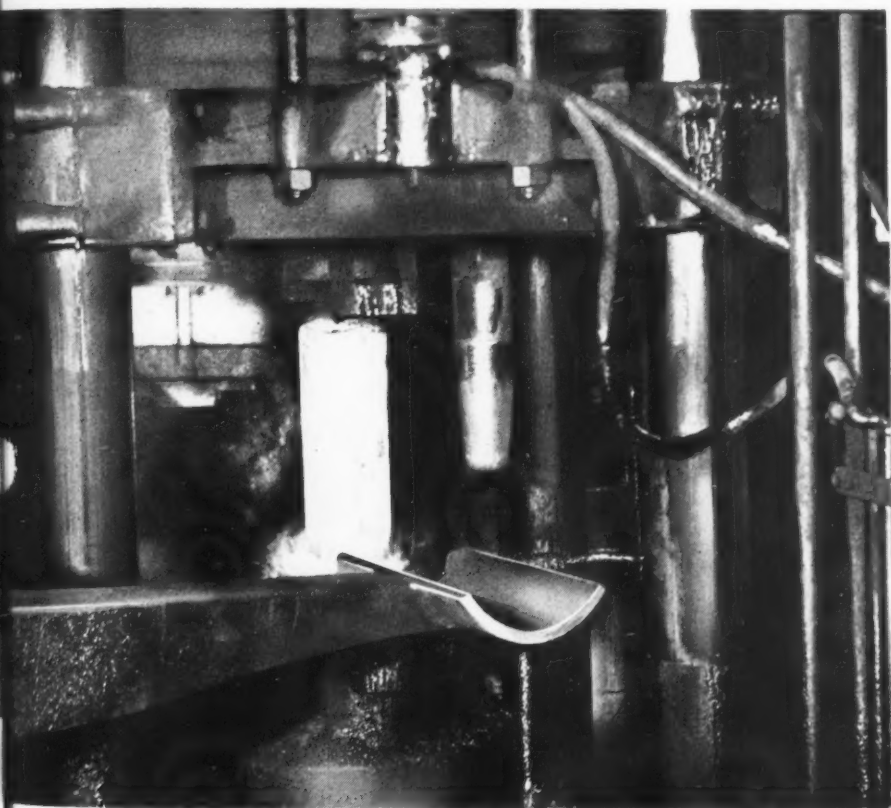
The Heated Billets are Pierced and Shaped to a Cylindrical Outside Diameter by the Use of a 500-ton Hydraulic Press
